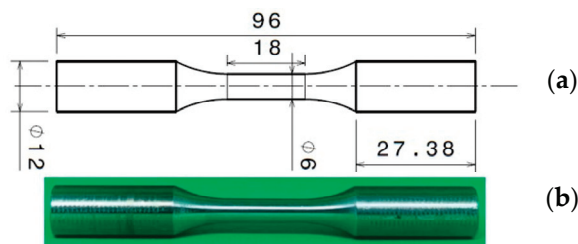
(a): Sketch and dimension (unit in millimeters); (b): actual experimental fatigue specimen.
